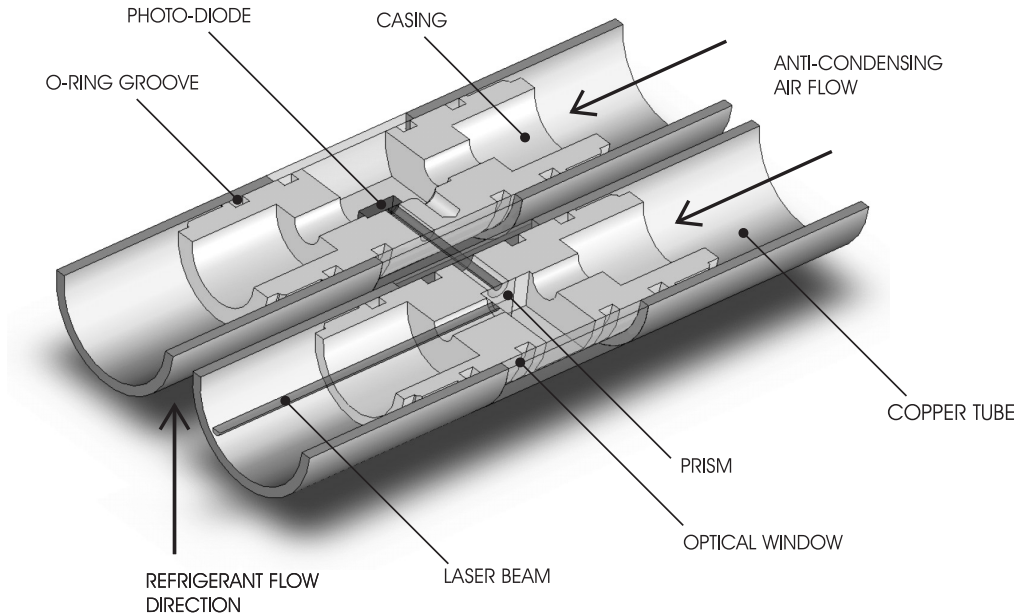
Section C-C, laser system layout indicating two tubes housing the laser and photo-diode
